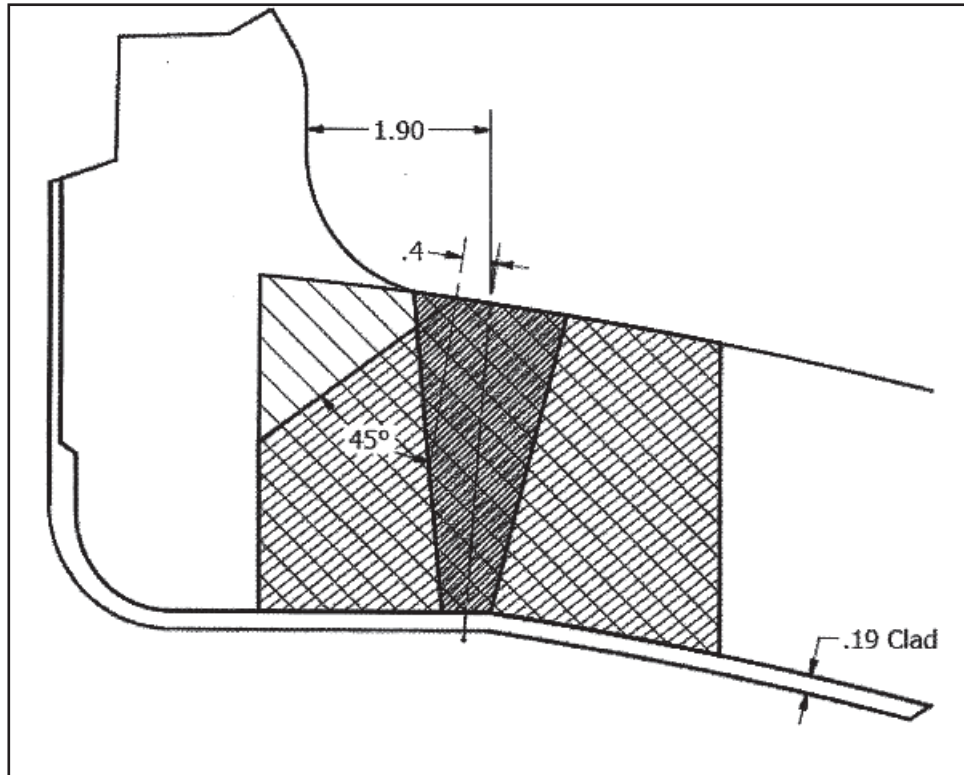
Weld WP-11, 45° Head Side Axial Scans
